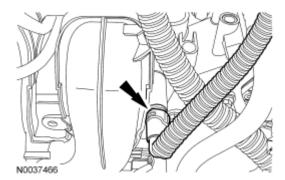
Locating Upper Radiator & Heater Hoses To Coolant Bypass Courtesy of FORD MOTOR CO.
